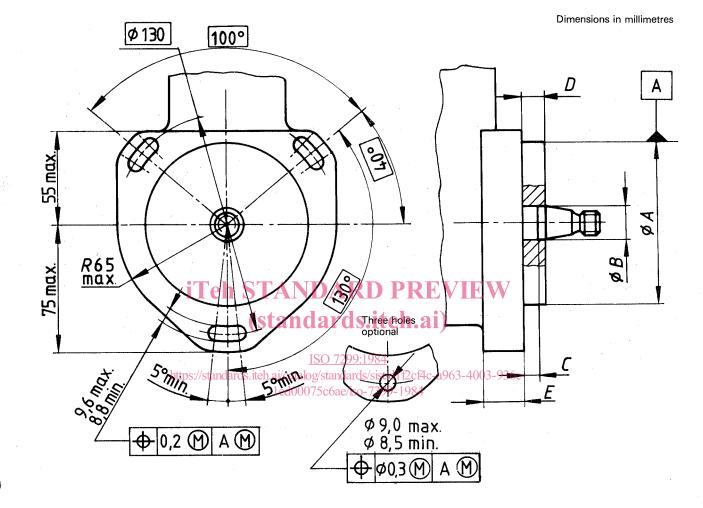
In-line fuel injection pumps - Type 6 end-mounting flange
